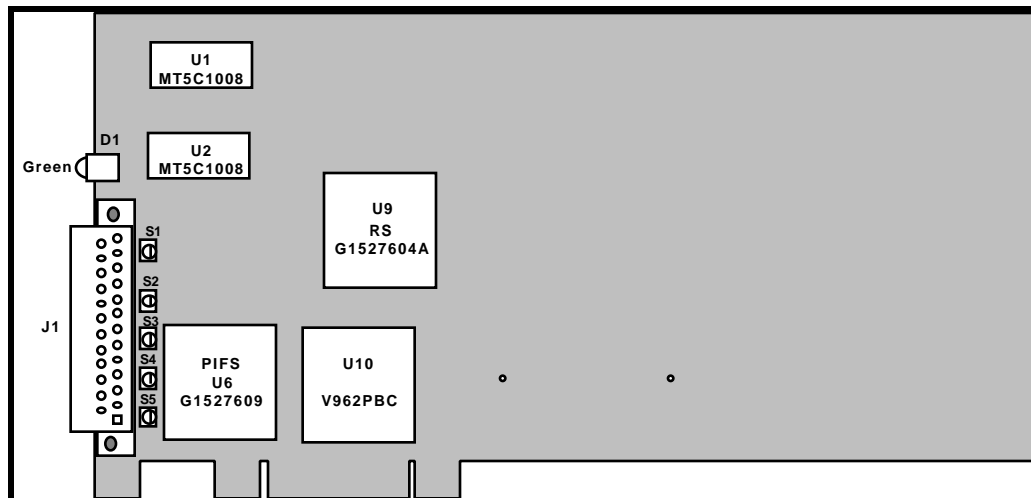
PCI10FR Mbps ES RSEC Assembly Board
